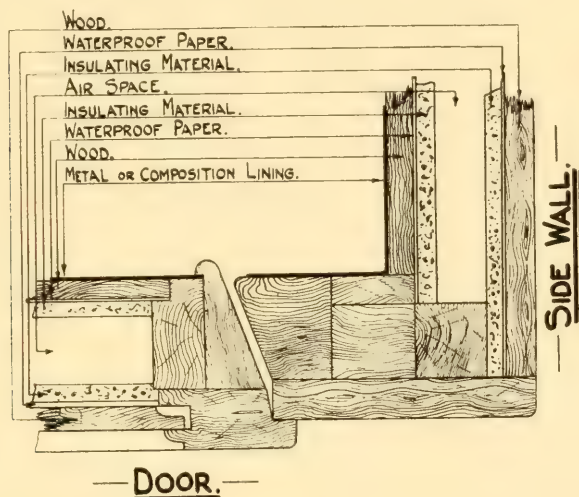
TYPICAL REFRIGERATOR WALL AND DOOR CONSTRUCTION.
